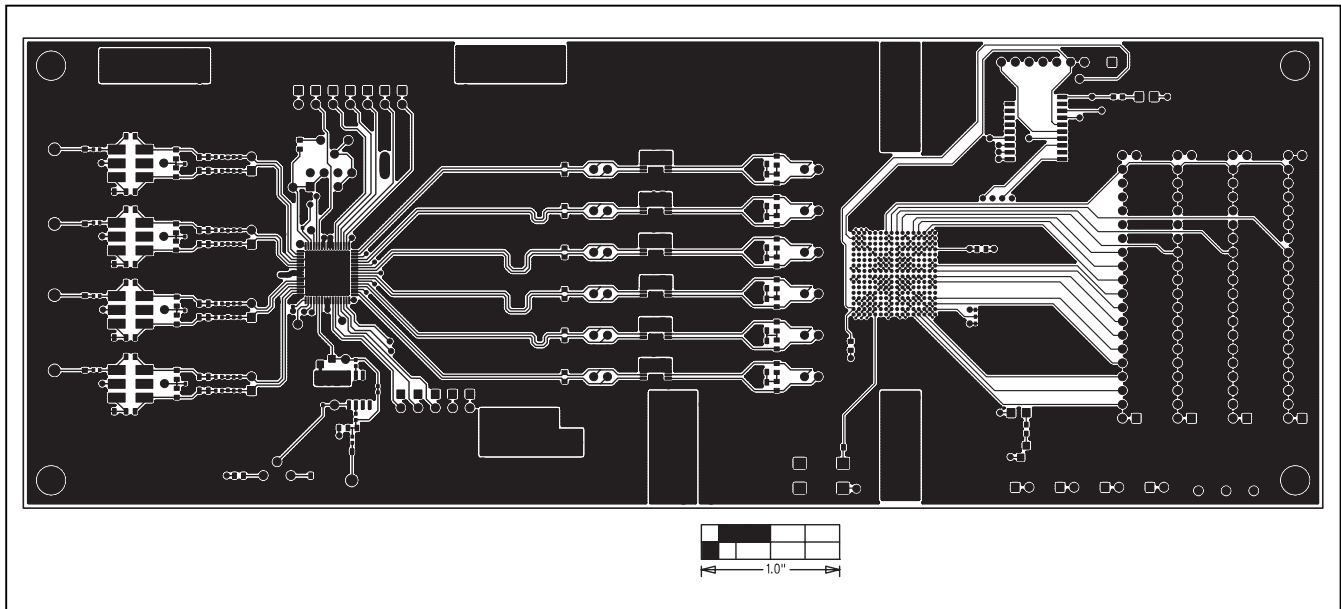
MAX1127 EV Kit PC Board Layout—Component Side
